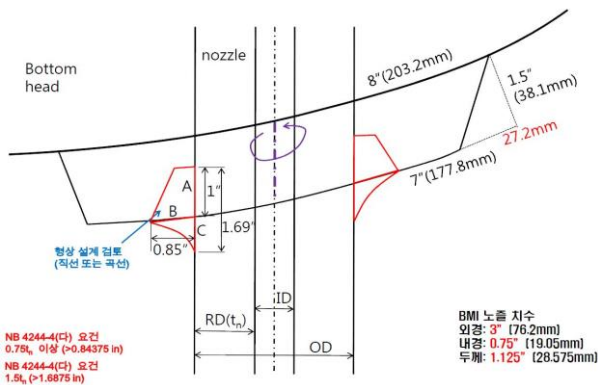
Geometry and Dimensions of Pad and J-Groove Welding
